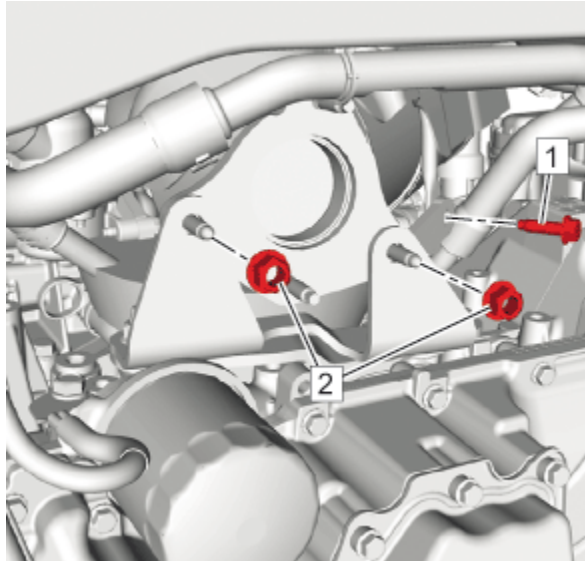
Catalytic Converter Bracket Nut And Bolt
